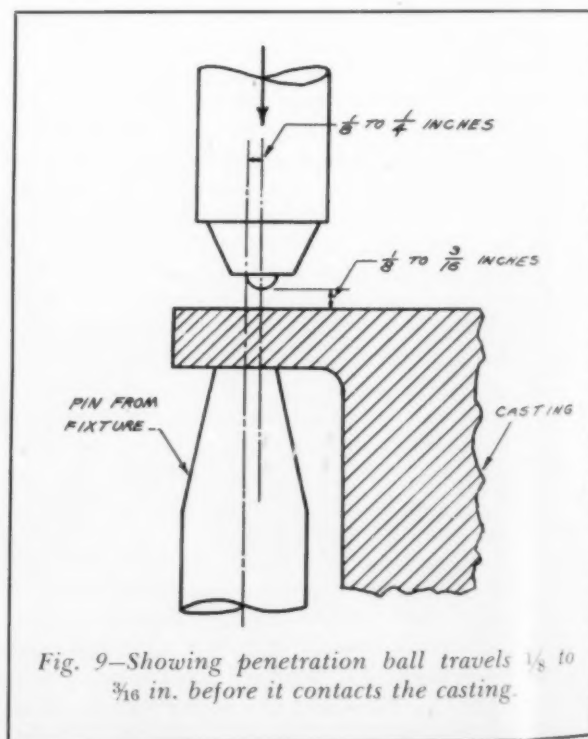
Showing penetration ball travels  $\frac{1}{8}$  to  $\frac{3}{16}$  in. before it contacts the casting.
